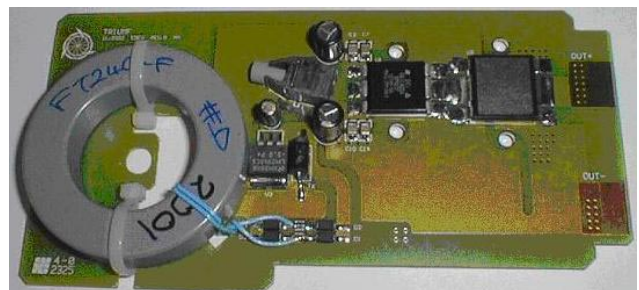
Prototype PCB developed for MuLan kicker (heat sinks and fibre optic receiver shield not mounted).
